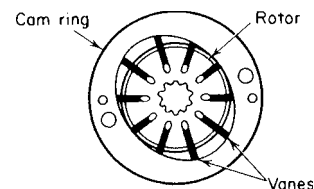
Rotary power-steering pump. (General Motors, Saginaw.)
